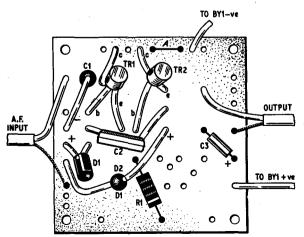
Layout of components on the printed circuit board. Only one link wire is needed at A
